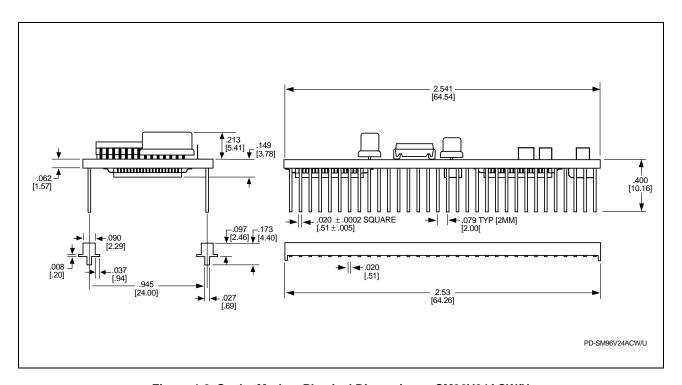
SocketModem Physical Dimensions - SM96V24ACW/U
